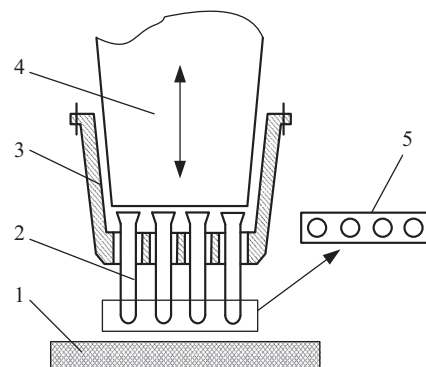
Impact head in UIT equipment: (1) specimen, (2) pins, (3) pins holding, (4) ultrasonic horn, and (5) the arrangement of the pins on the head.
